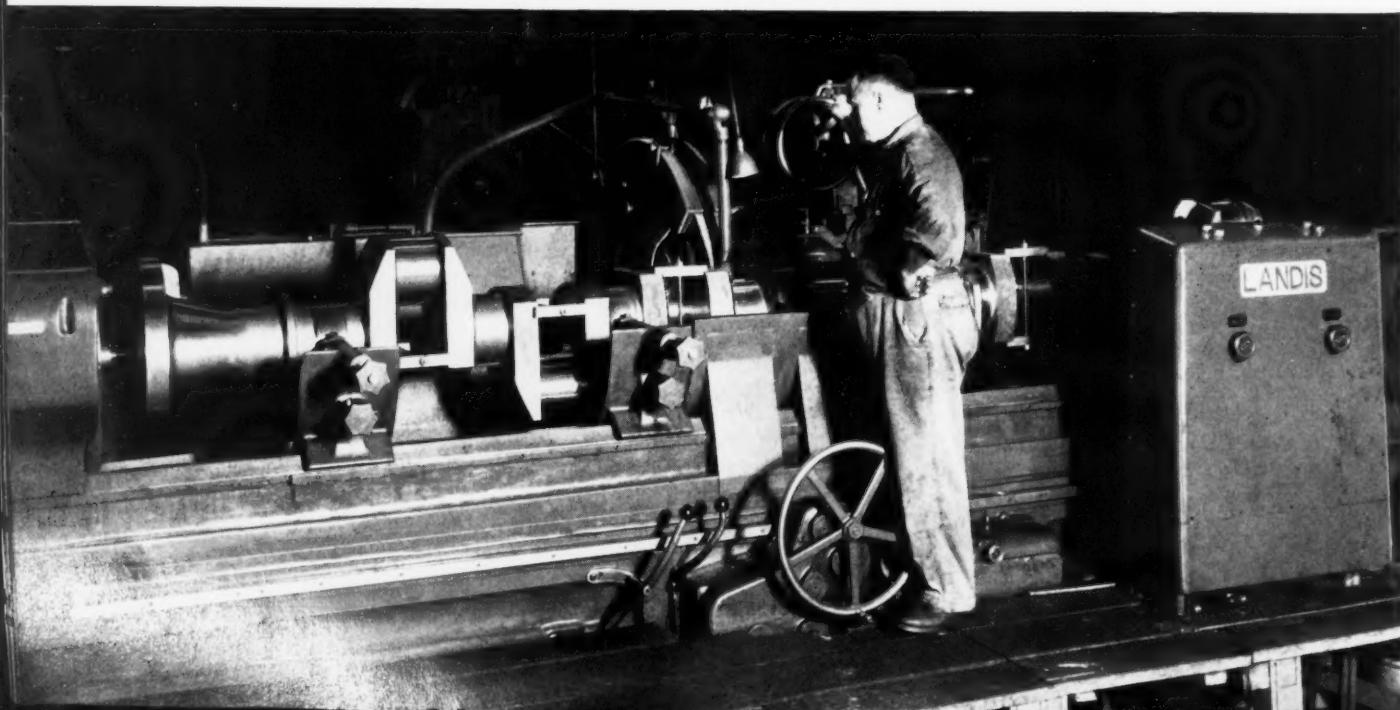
(Below) Grinding the Main Bearings of a Diesel-engine Crankshaft in Accurate Alignment and Parallel
